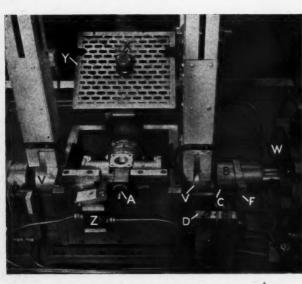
The fixture for meter bodies and the ends of the magazines for liners on the semi-automatic inserting machine
